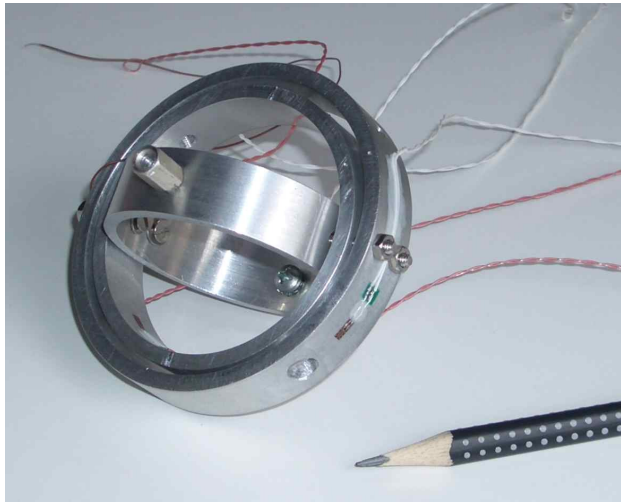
Mechanical structure of the 80 mm three-axis load cell during assembling. The three rings are shown without inside electronics and covers.
